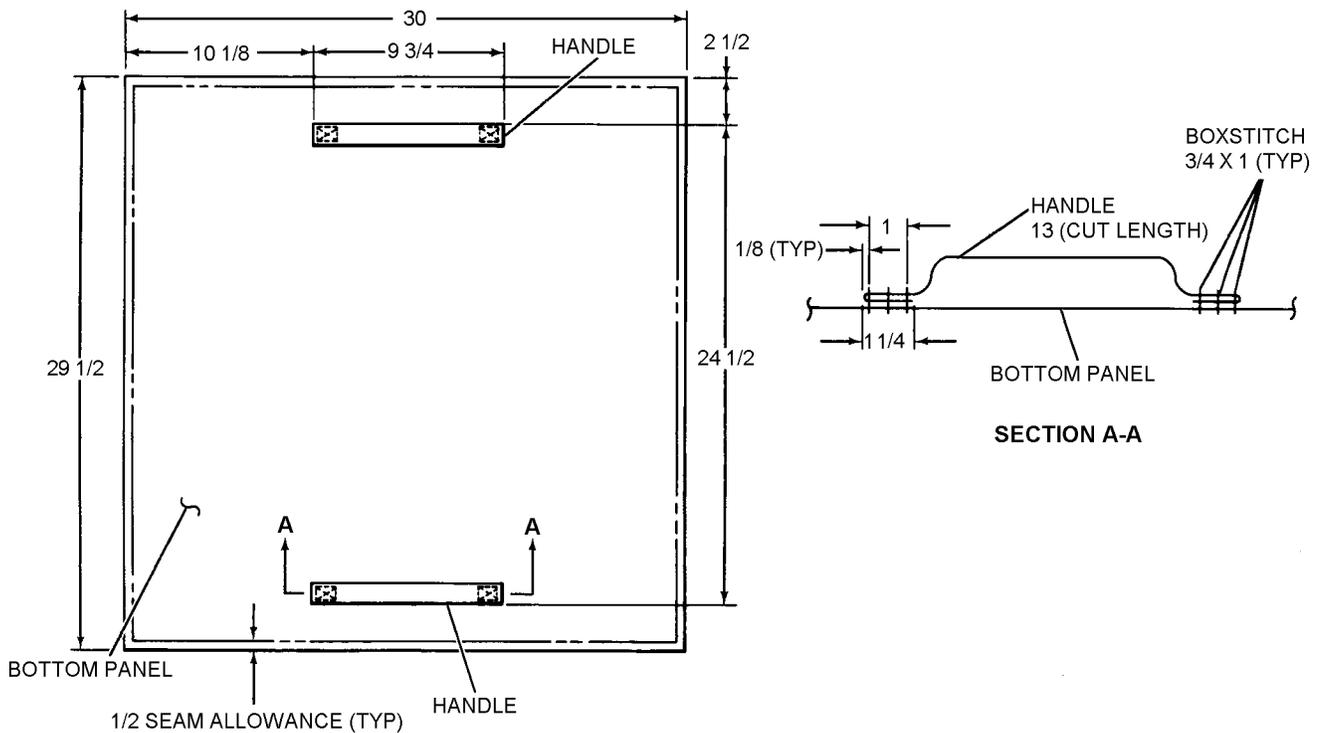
Bottom Panel Assembly, LRU-13/A Liferaft Container
